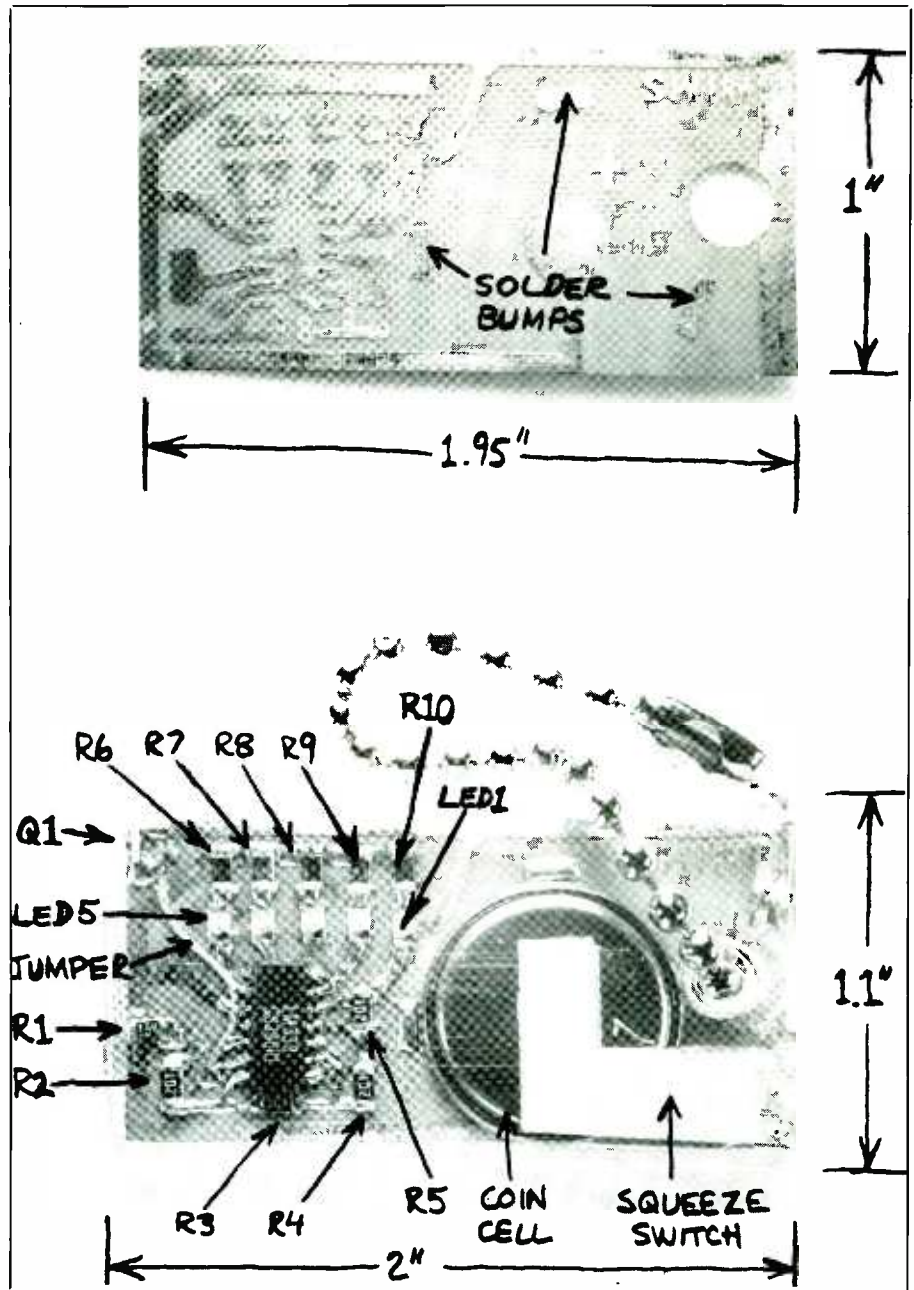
Etched pc board for lightmeter circuit (upper) and hand-wired board using surface-mountable components (lower).
